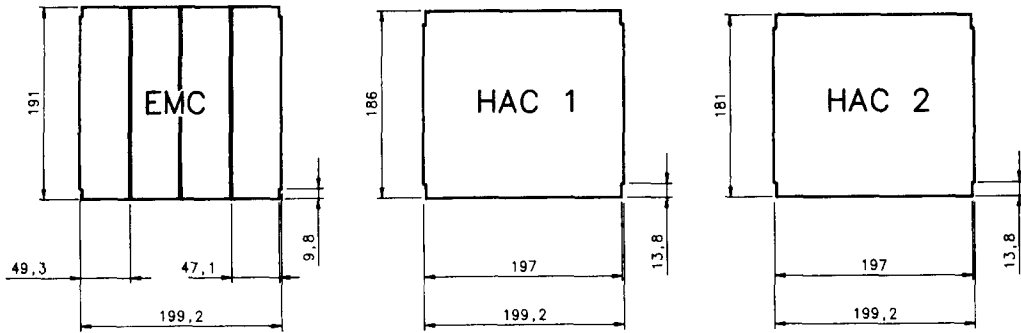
Scintillator tiles for FCAL sections showing the transverse dimensions.
